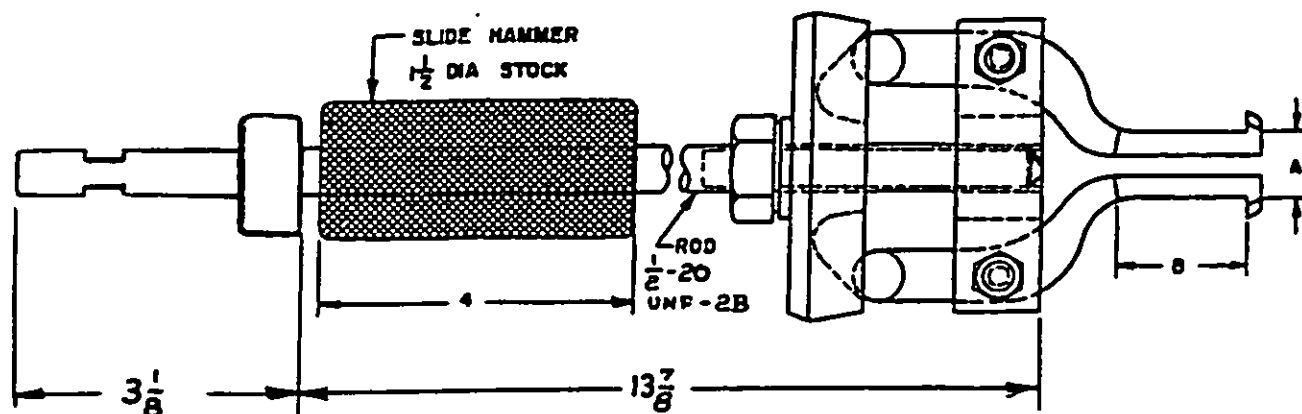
Type III, class 1, puller, mechanical, slide hammer, bearing, two-jaw, internal.
